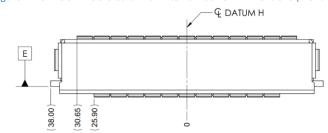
SFF OCP NIC 3.0 Card with Internal Lock CTF Dimensions (Side View)
